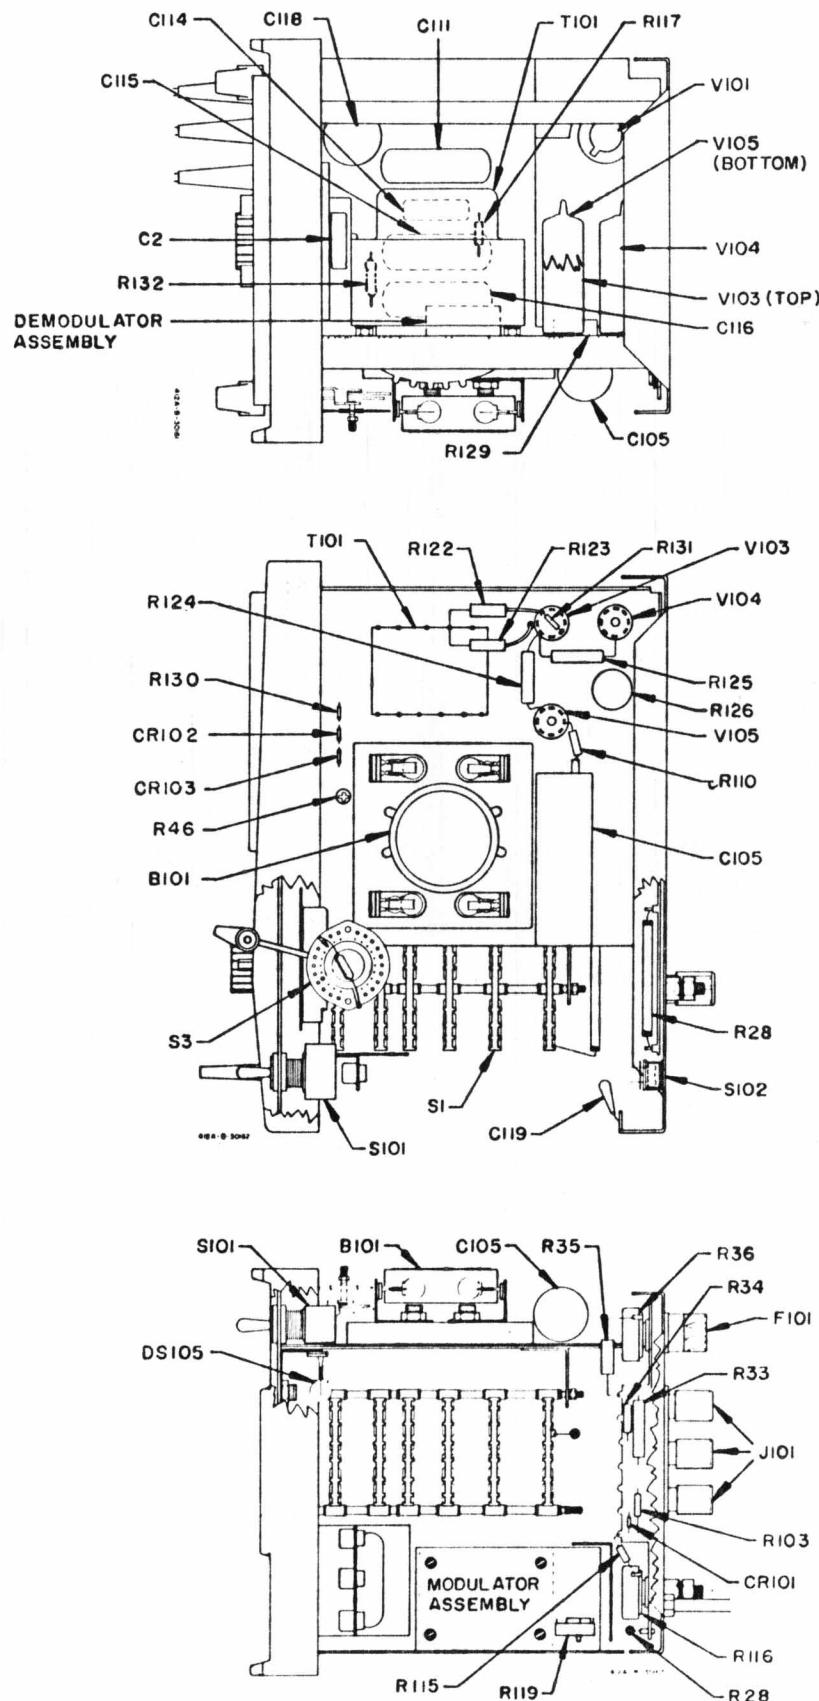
Location of Chassis Mounted Parts, Cabinet Model
